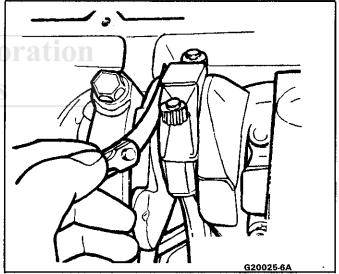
Measuring Connecting Rod Side Clearance (Single Rod Journal)
